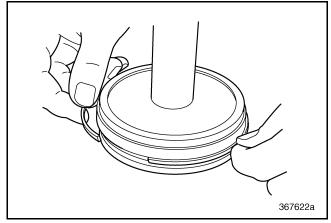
Installing Wiper Ring in Upper (Thin) Piston Groove
